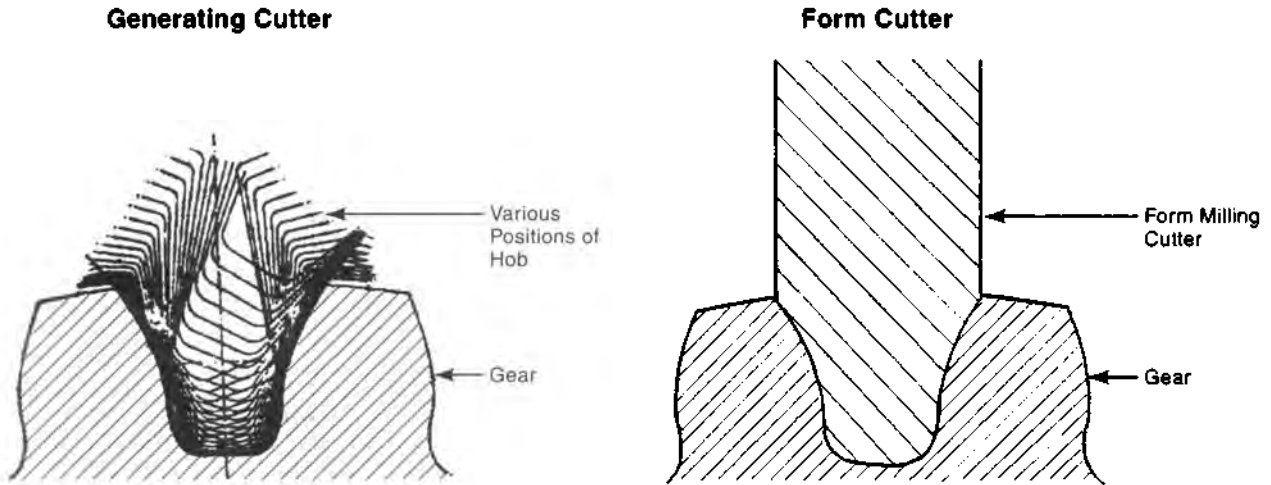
The action of a generating-gear-tooth cutter as contrasted with a form cutter. (The drawing of the generating cutter is based in part on an illustration from D. W. Dudley, *Gear Handbook*, McGraw-Hill, New York, 1962.)
